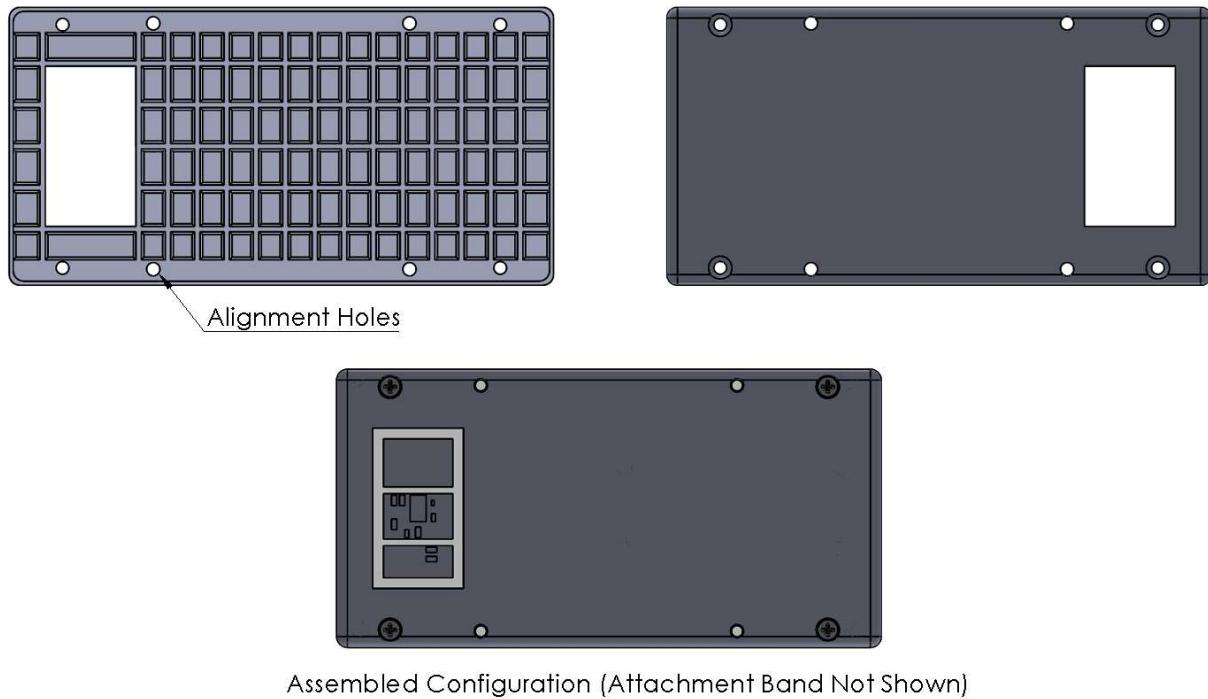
Attachment Plate overview and assembled Measurement Unit configuration
